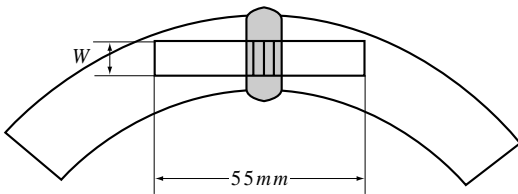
The position of selection for impact test specimen taken from the weld zone of electric-resistance welded steel pipes
